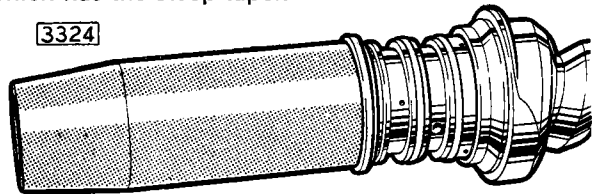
Fitting a Teflon ring using the valve seal expander (Tool No. J.32)
